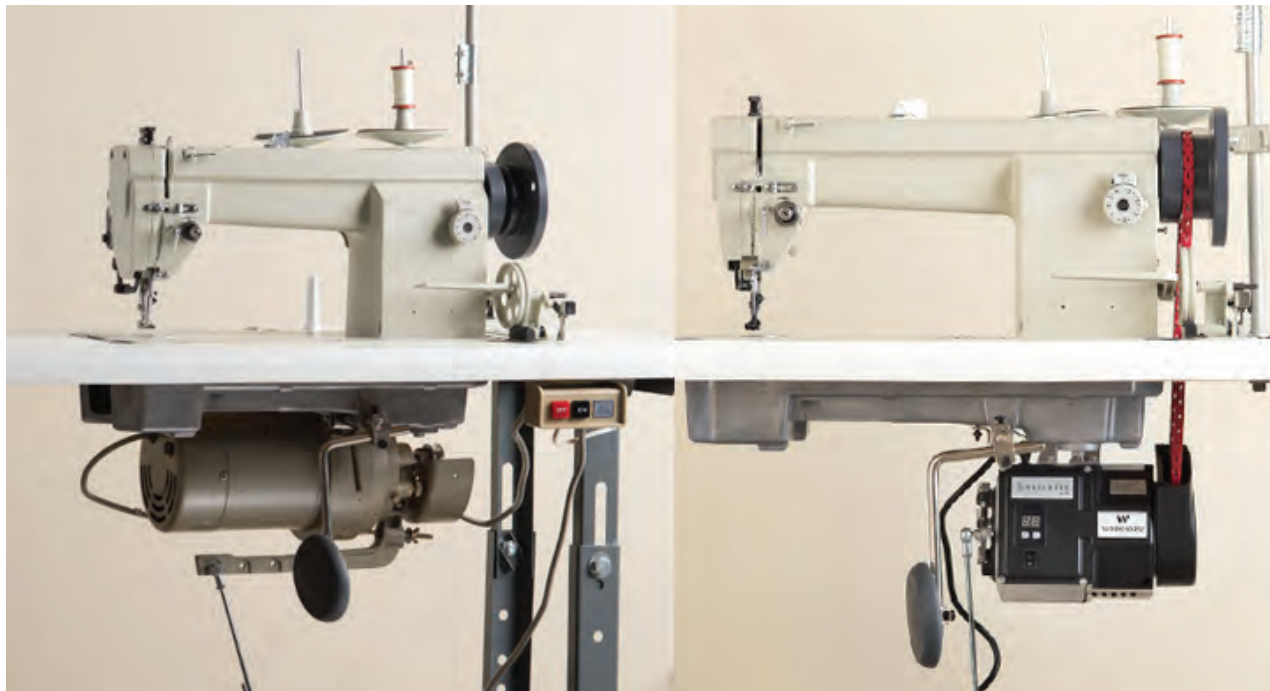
Industrial sewing machine with a clutch motor (a) and a servo motor (b).
